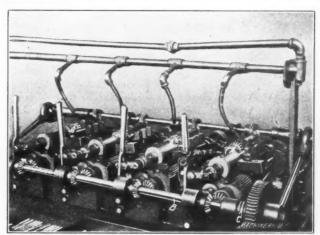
Tap Chamfering and Relieving Machine with Eight Spindles, of which Four are shown in the Illustration.
